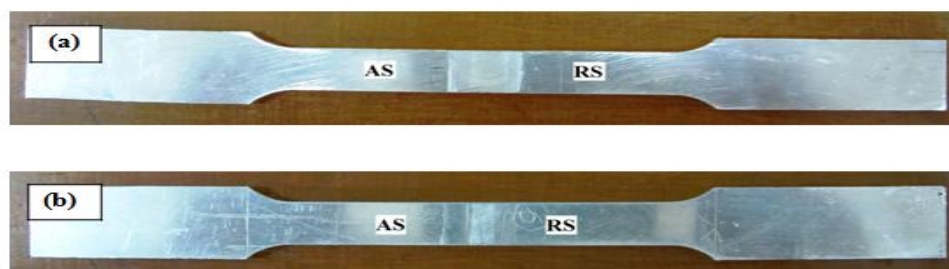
Showing (a) Top surface of weld (b) Bottom surface of weld
